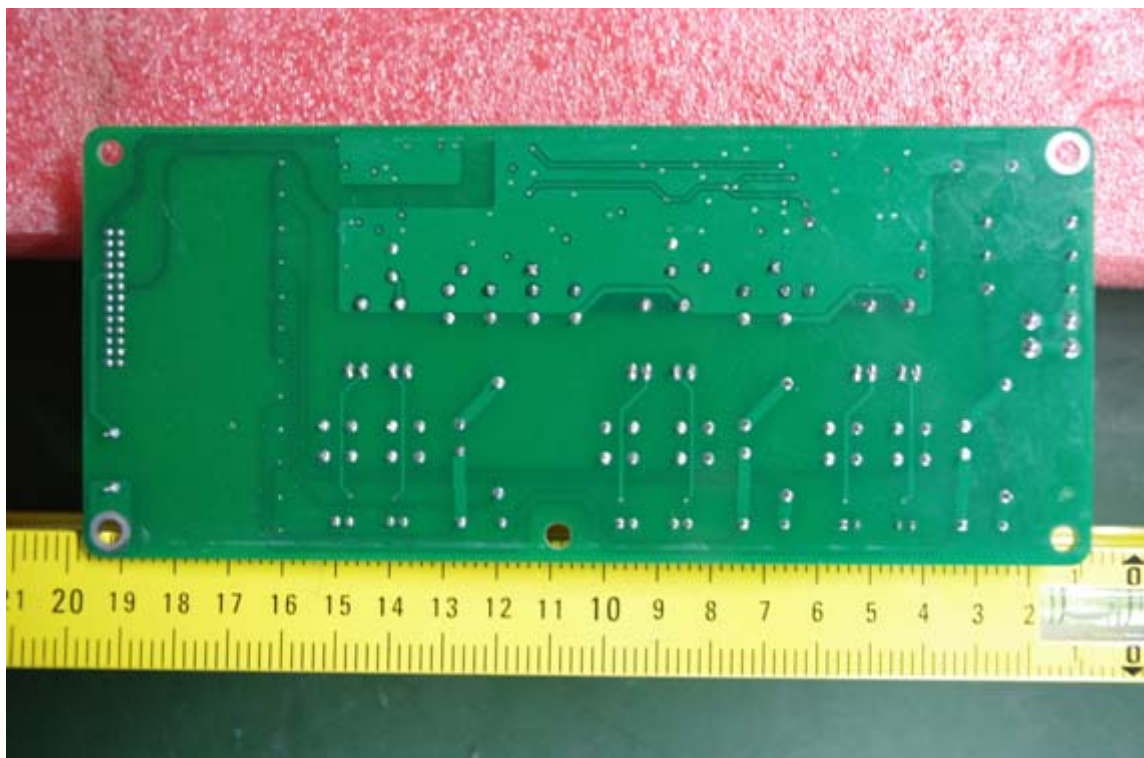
Board SNT\_3320\_PCB\_CQ, traces side view
